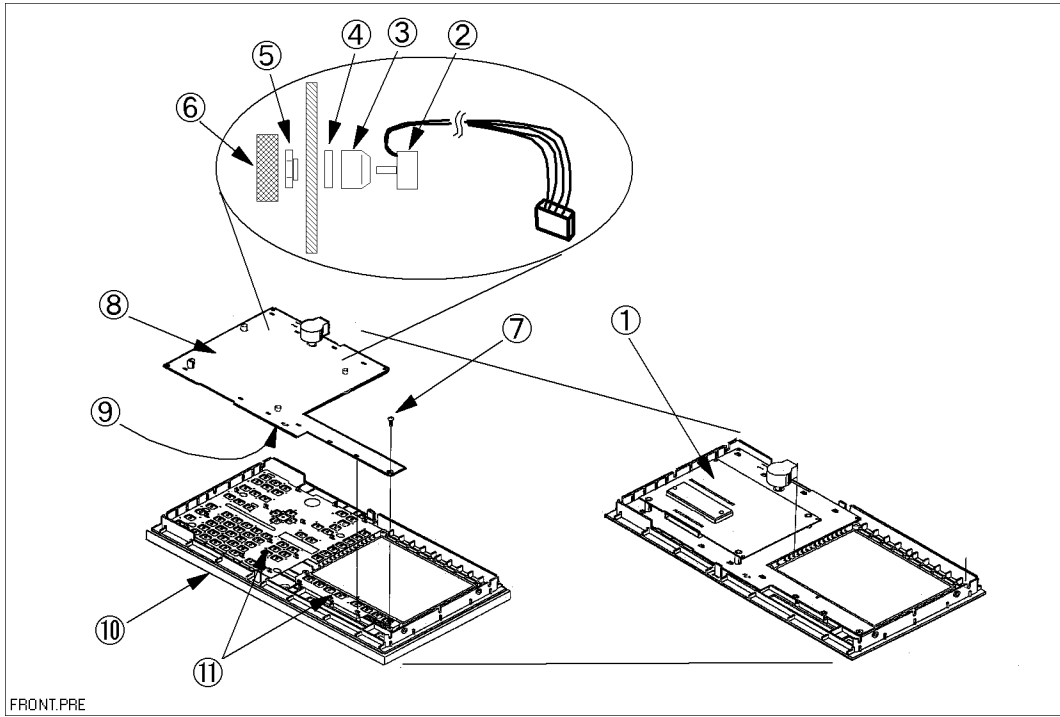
HP 4155B/4156B Front Panel Assembly Parts Location (1 of 2)
